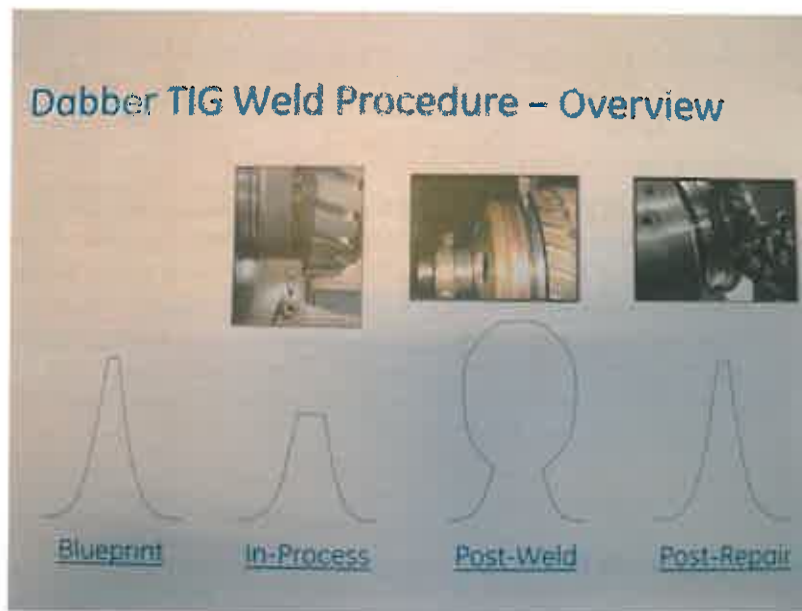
Repair with the GE method “Dabber⁵⁵ TIG Weld ”.
